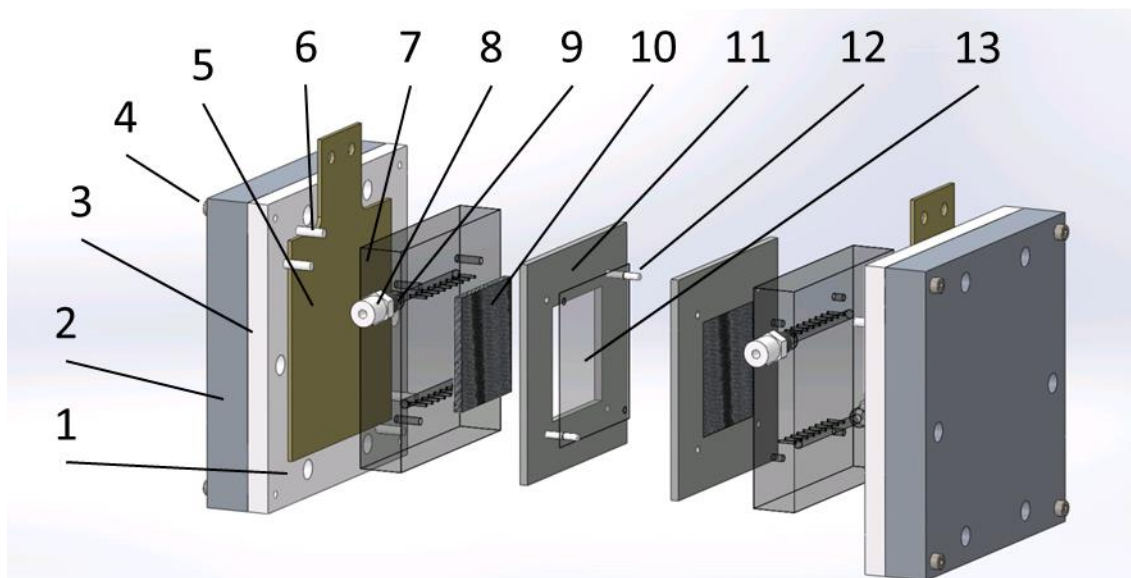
Schematic drawing of the single cell with 25 cm² active geometric electrode area: (1) M8x120 threaded holes for hexagon head screws, washers, and nuts, (2) 20 mm thick aluminum endplates, (3) PVC-U isolation plate, (4) M4x30 hexagon socket screws, (5) gold-plated Cu current collector, (6) 4 mm PVC-U pins, (7) 20 mm thick PPG86 monopolar plates, (8) G1/8" threaded screw-ins for DN04/06 tubings, (9) epoxy bonding, (10) 25 cm² GF4.6 graphite felt electrodes, (11) PTFE foil flow frames, (12) 3 mm PVC-U pins, and (13) 50 mm thick AEM (FAP450) or 50 mm thick CEM (NF212). Reproduced with permission from supporting information of reference.^[33]
